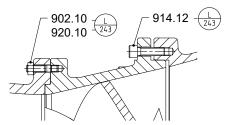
Screw/bolt/stud connection bellmouth/casing wear ring/pump bowl
